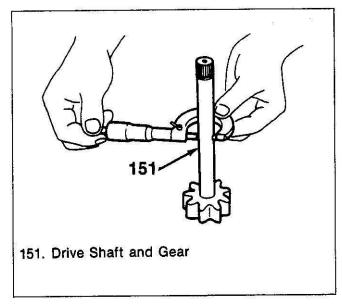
Check Oil Pump Drive and Driven Shaft Diameter
